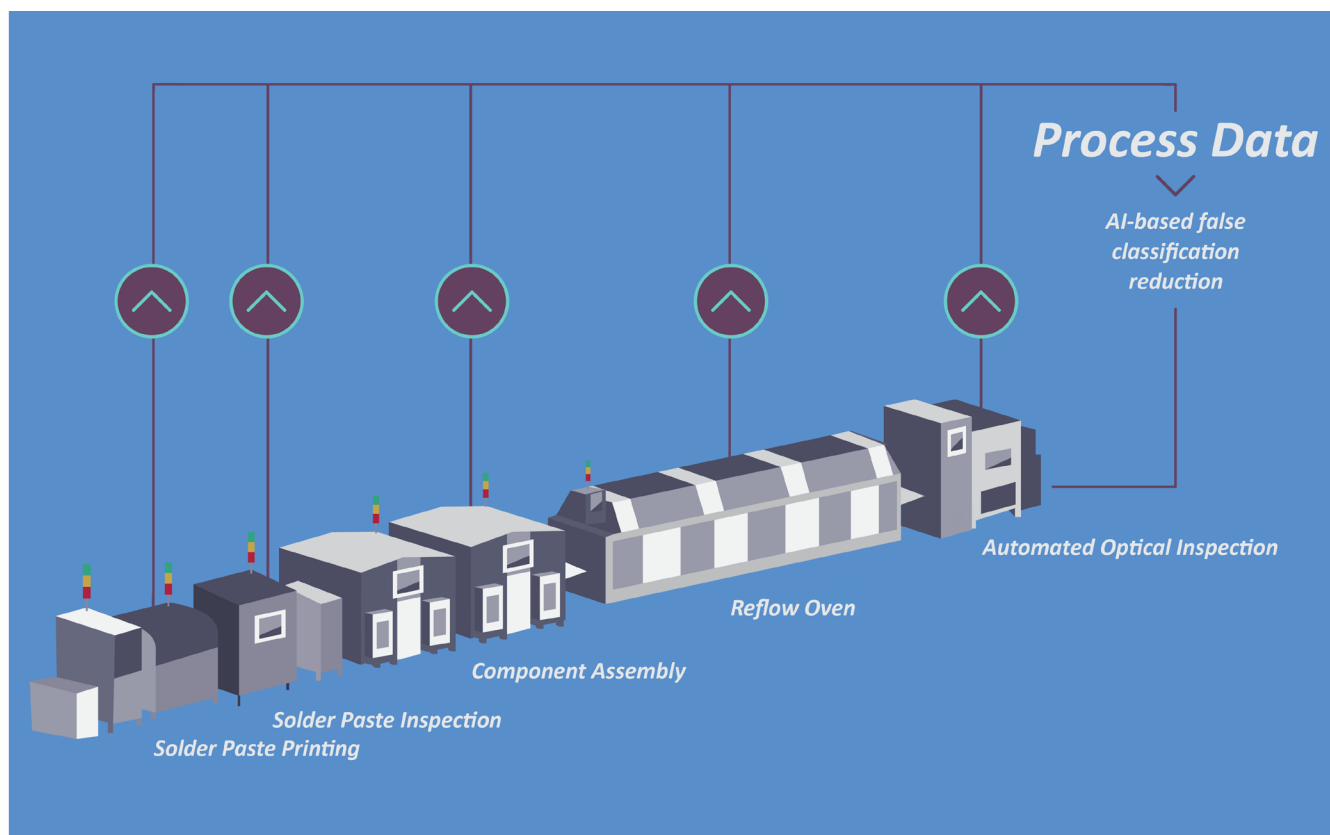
Typical PCB production line with automatic optical inspection (AOI)
